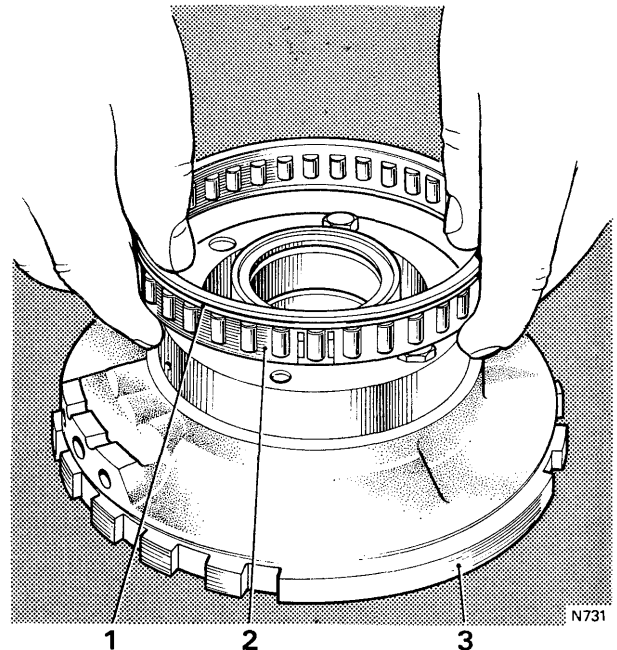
FITTING THE REAR SPRAG TO THE CENTRE SUPPORT (SPRAG CLUTCH)
